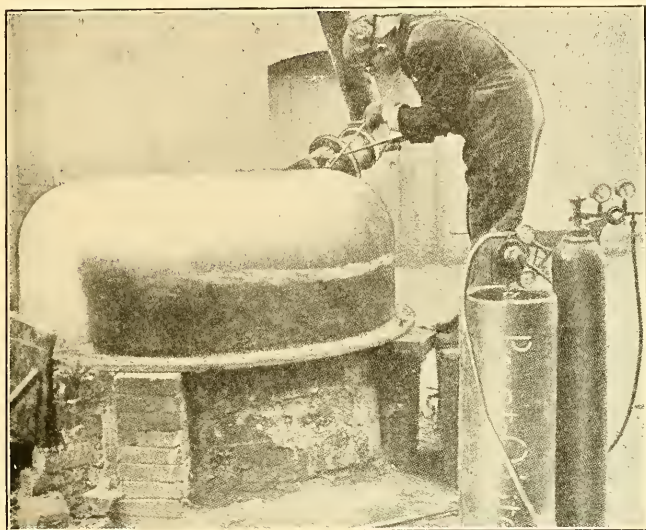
Preheating and Welding a Large Kettle.
